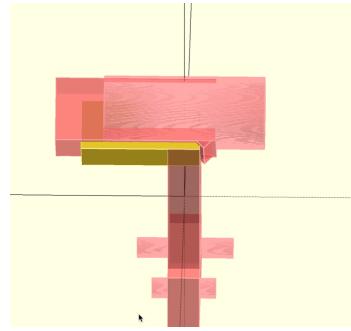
Openscad code showing the translation of shapes to create the sample tube holder design.
